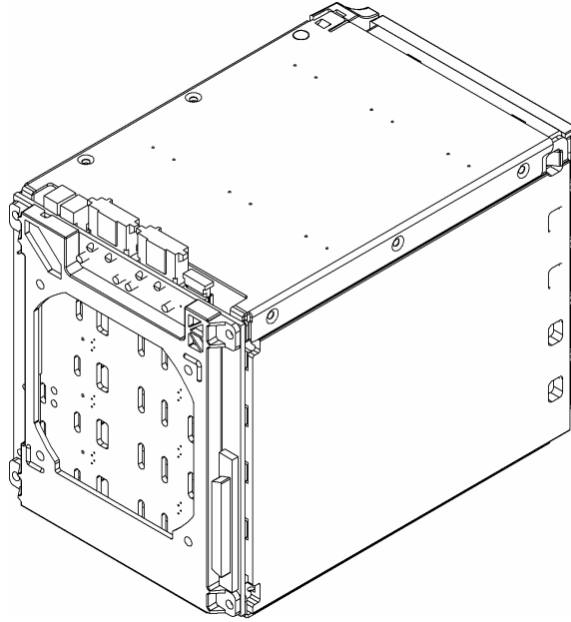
Hot-swap Drive Bay, Rear Isometric View
